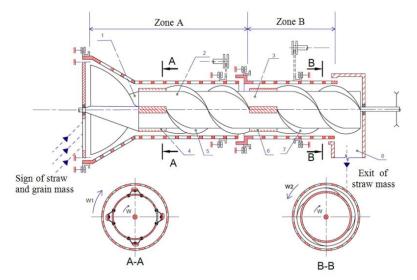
Axial threshing mechanism for harvesting of the mixed crops with separately rotating parts of a body
